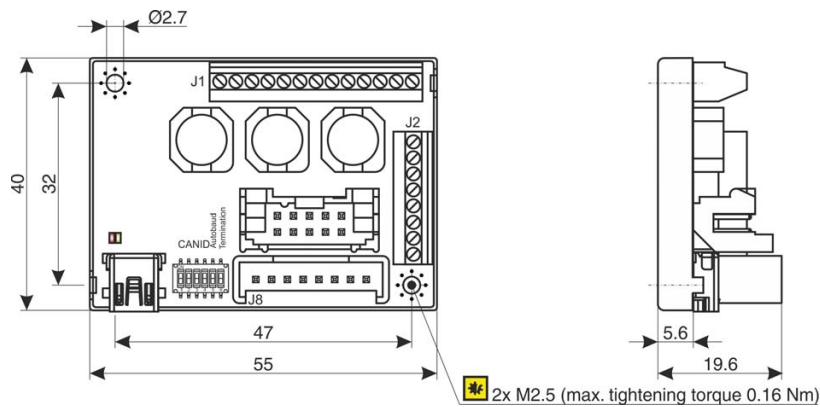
Dimensional Drawing [mm] – EC (380264)
